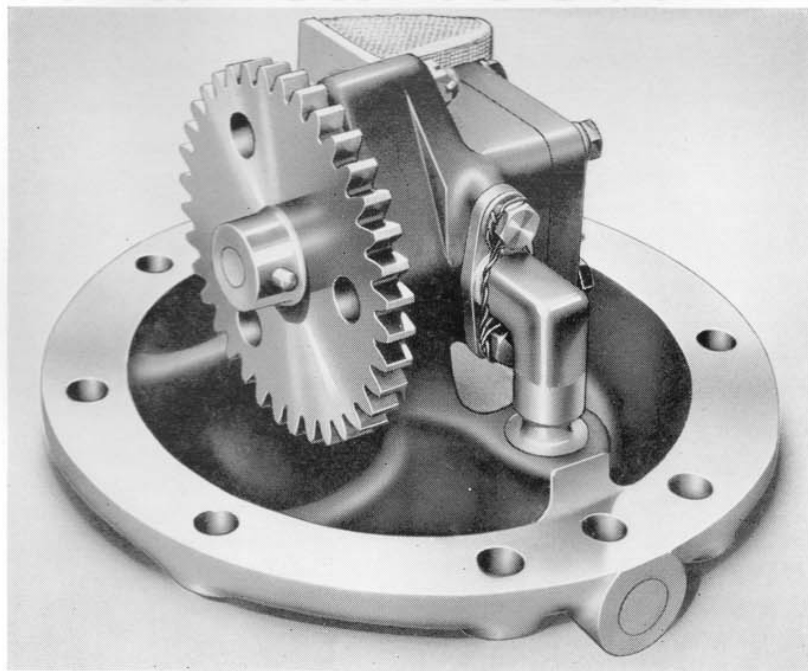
VIEW OF OIL PUMP AND BASE PLATE
